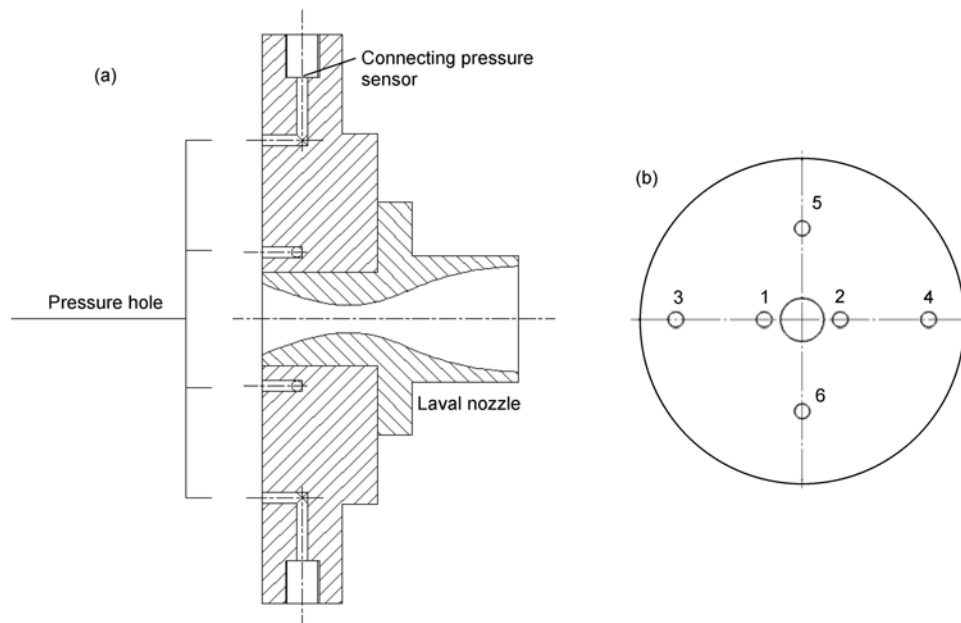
Structure of a composed nozzle device. (a) Cross sectional view; (b) front view.
